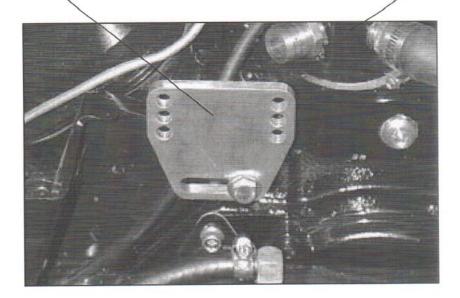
LOWER INTERCOOLER BRACKET MOUNTED TO ENGINE
